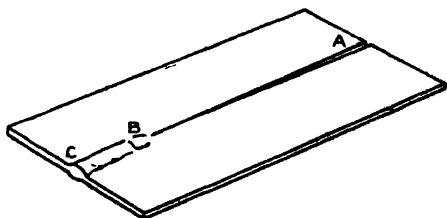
Distortion in a simple weld between two plates.
